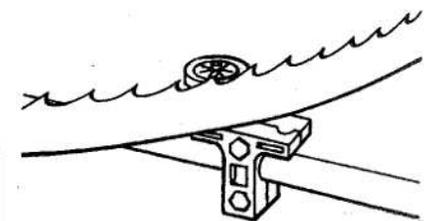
BLADE SUPPORT (RIGHT).
